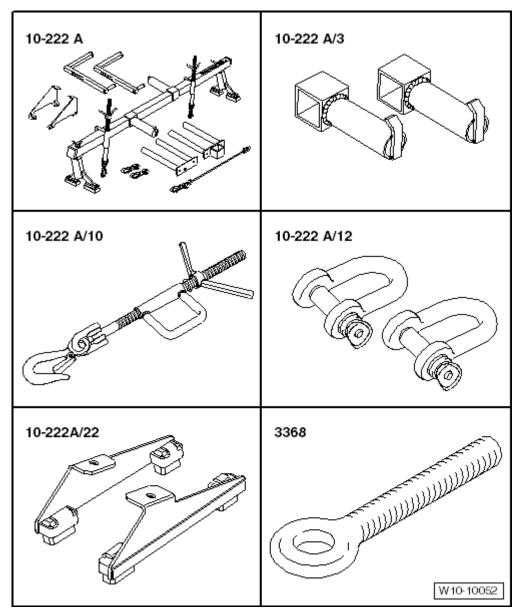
Identifying Engine Support Bridge And Special Tools Courtesy of AUDI OF AMERICA, LLC
